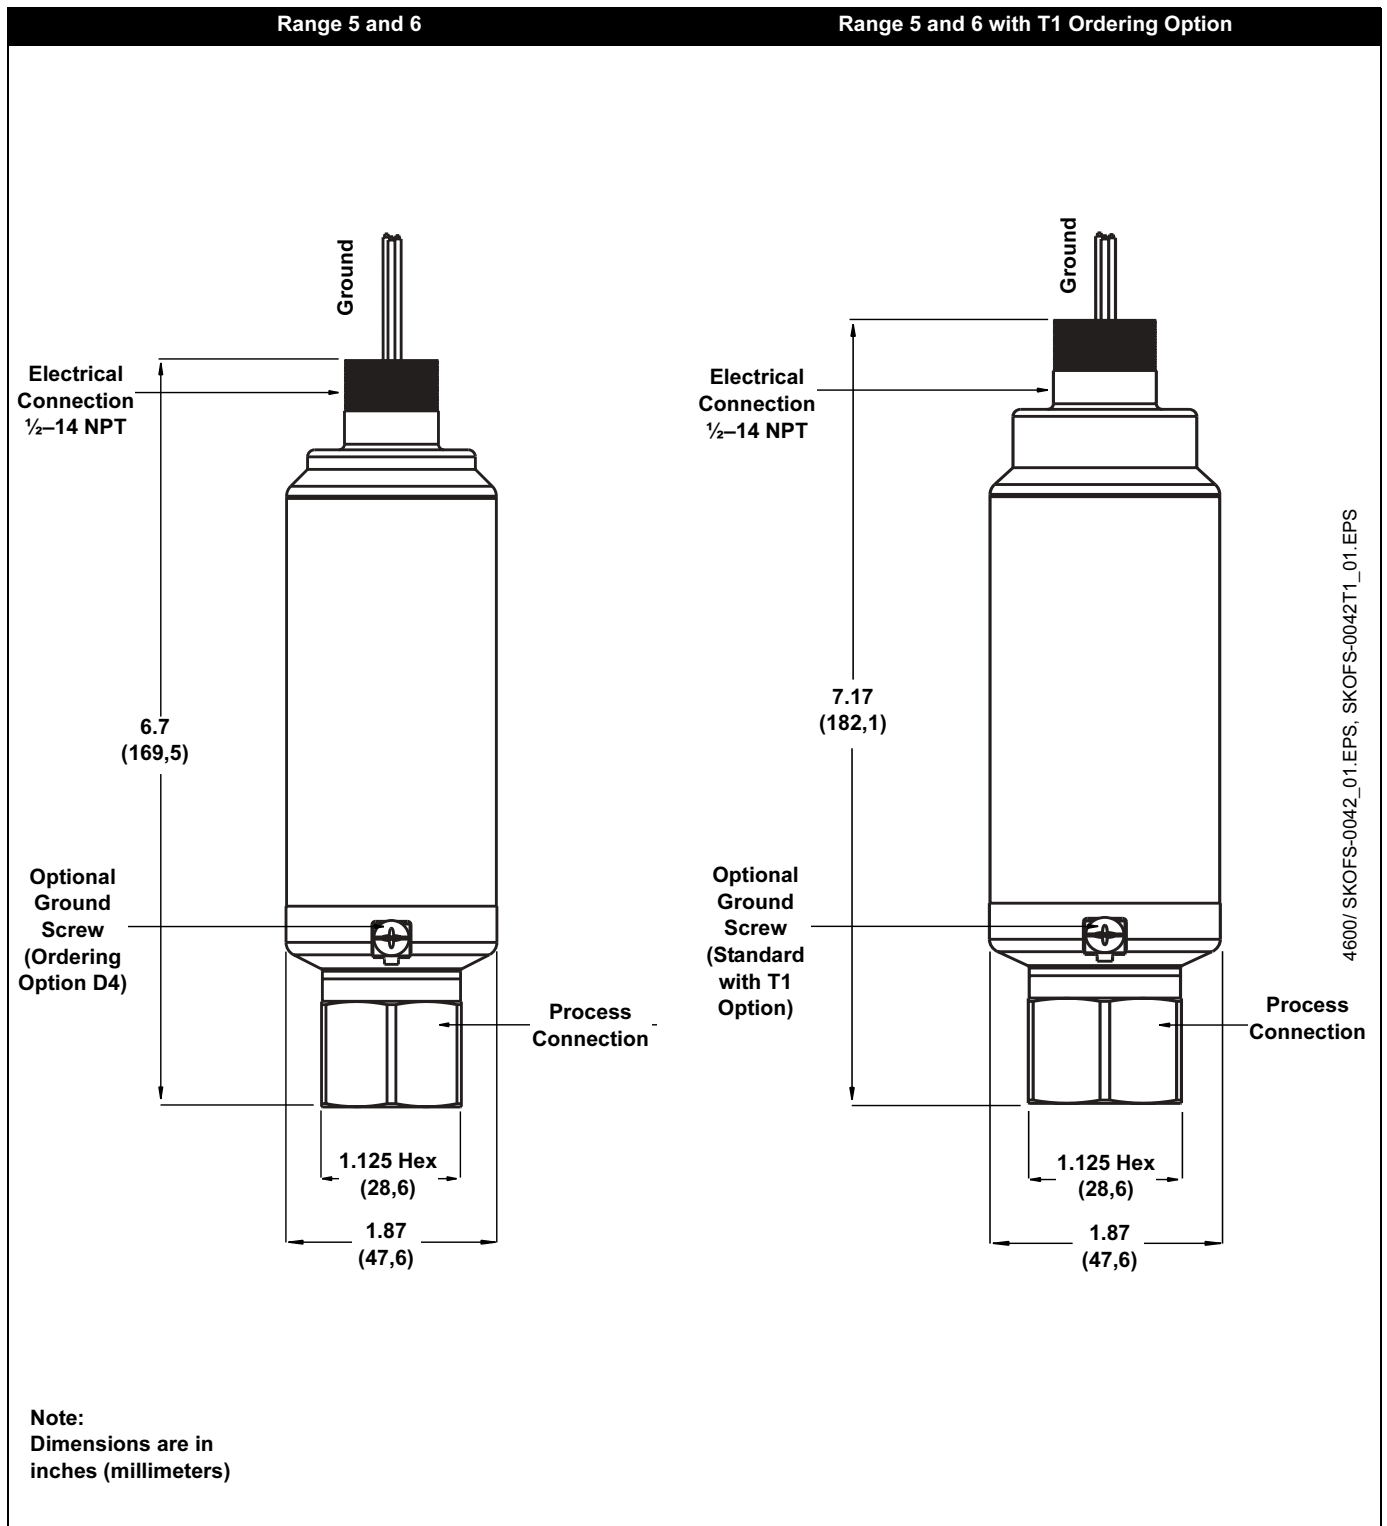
Dimensional Drawings for the Rosemount 4600 Oil & Gas Panel Pressure Transmitter
